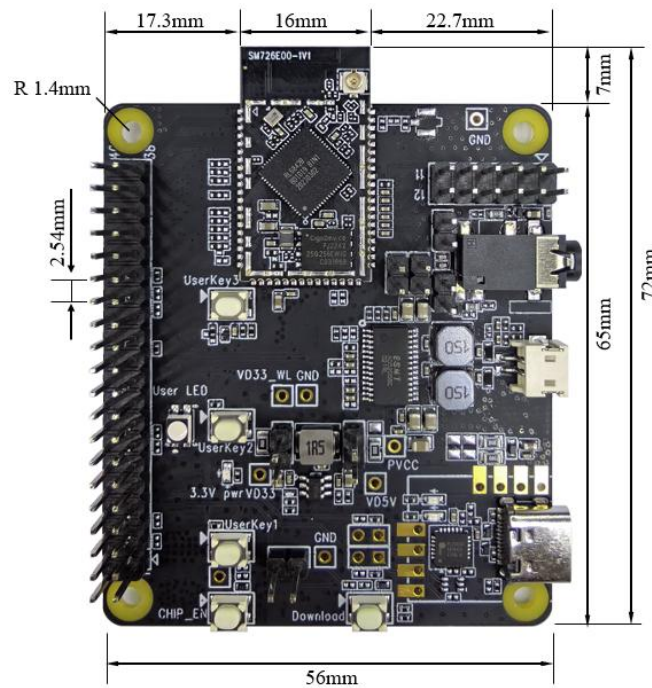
PKE8713ECM-VA4-N43 Board Dimensions
